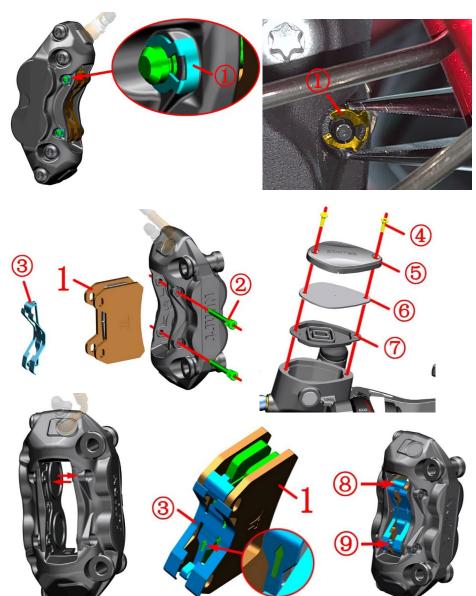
FRONT FORK		Replace the front brake pads	CHK
